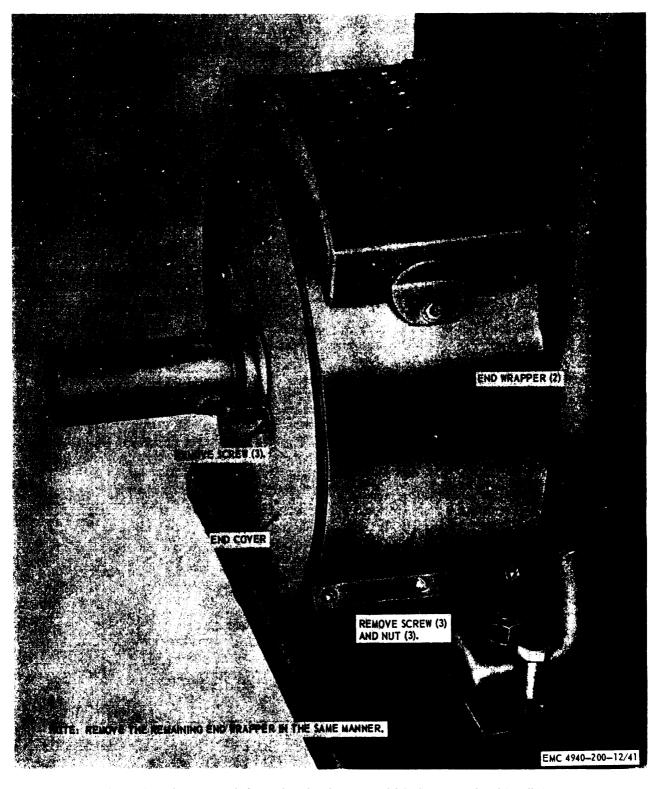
End wrappers, shaft guard, and end cover, Model SECM, removal and installation.
